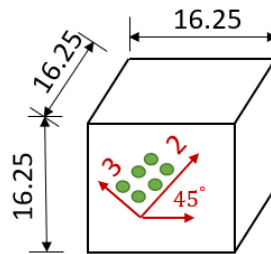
Specimen geometry and layout (dimensions shown in mm).
